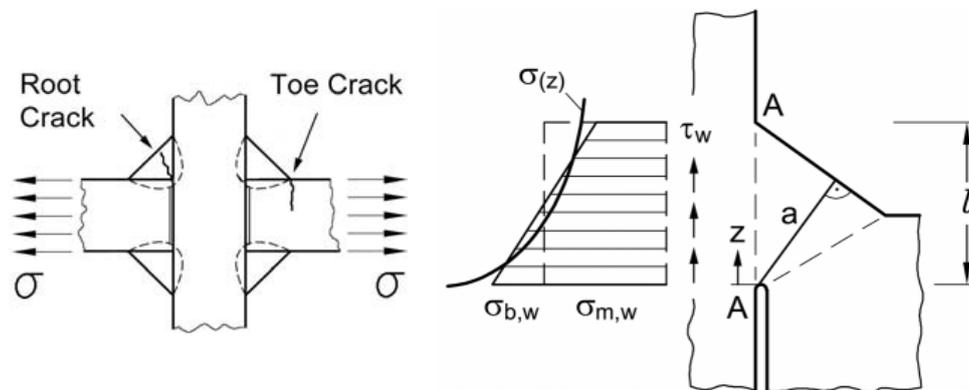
Possible fatigue cracks in fillet-welded cruciform joints and the linearization of stresses in the leg section of a partial-penetration fillet weld (Fricke, 2006a)
